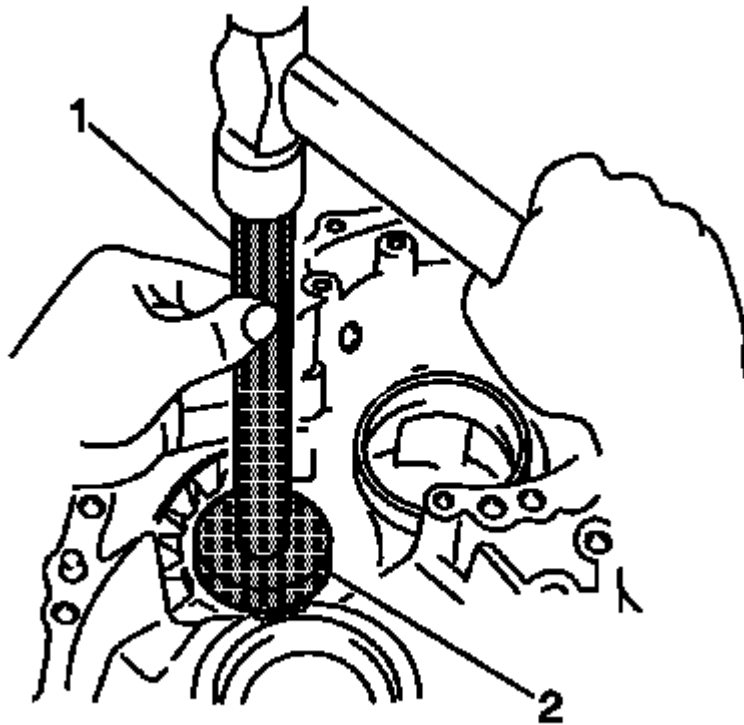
Pressing In A New Outer Tapered Roller Bearing Race Using DT 46464 & DT 46465
